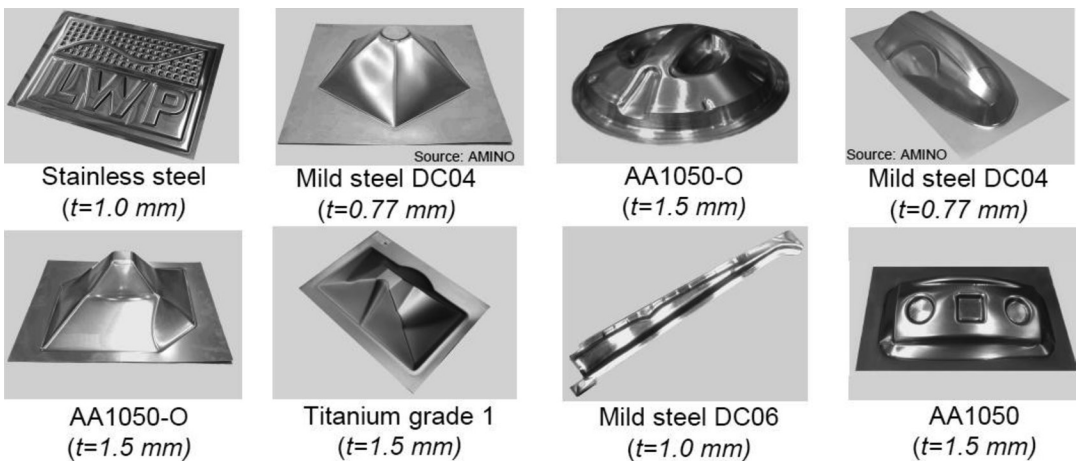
Various parts manufactured by incremental sheet forming. t , initial sheet thickness of the blank. Source: Ref 13.2
